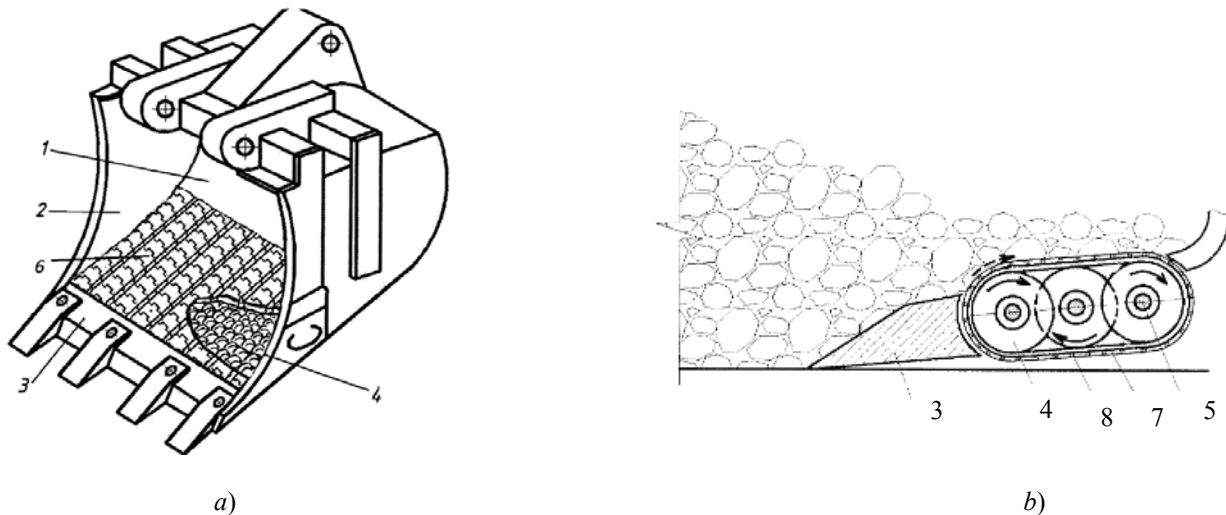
Bucket working body with conveyor bottom in the form of closed belt (a) and its position in front of lumpy rockpile (b): 1 — bucket capacity; 2 — side walls; 3 — bottom; 4 — rollers; 5 — axis of rotation; 6 — belt; 7 — plates; 8 — pins
